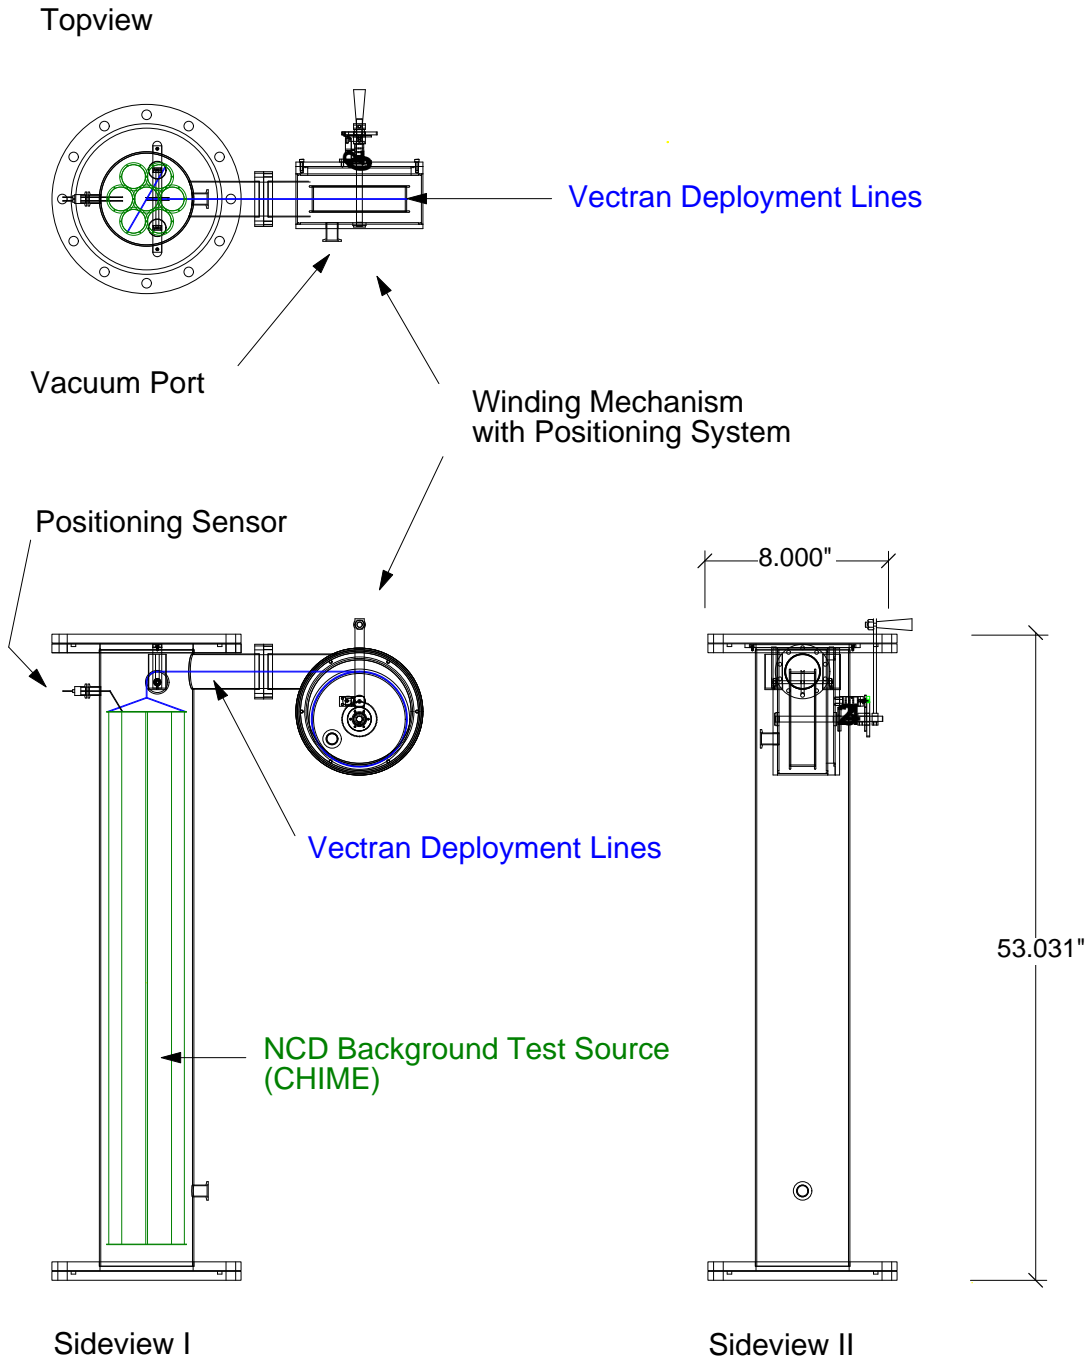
CHIME deployment mechanism consisting of a cylindrical source tube and a winding drum.
